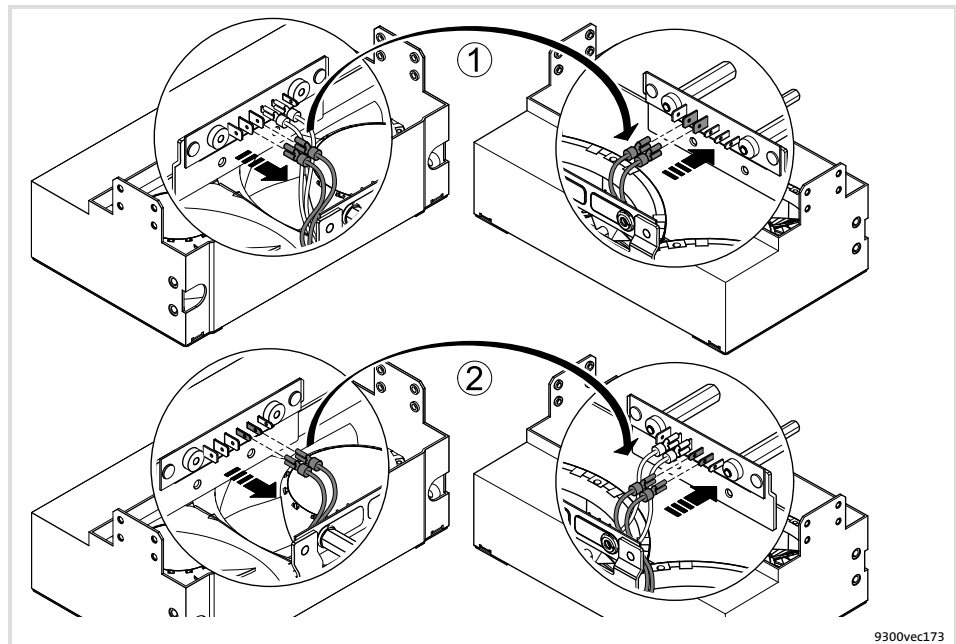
Plugging the fan connecting cable for the voltage supply to another terminal
